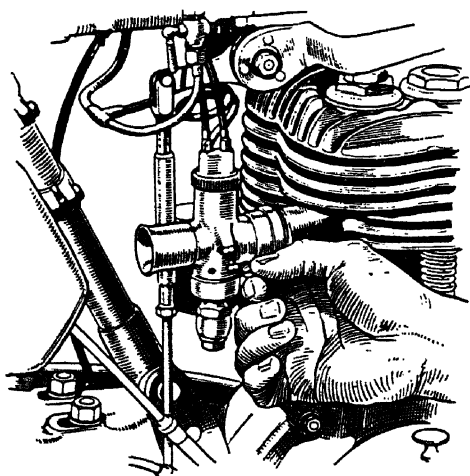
Adjusting the Triumph Amal Carburettor.
